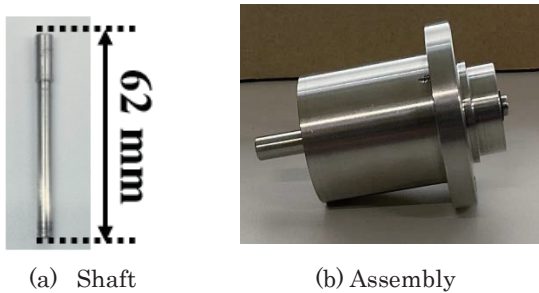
Appearance of the measuring motor used for mechanical loss measurement (Shaft only).
